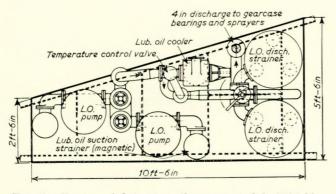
Gearcase lubricating oil system module 8000 bhp
